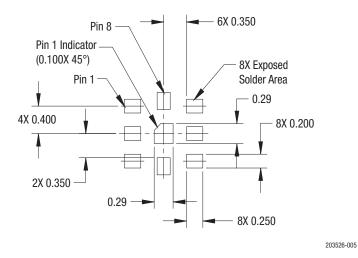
SKYA21039 PCB Layout Footprint (Top View)
